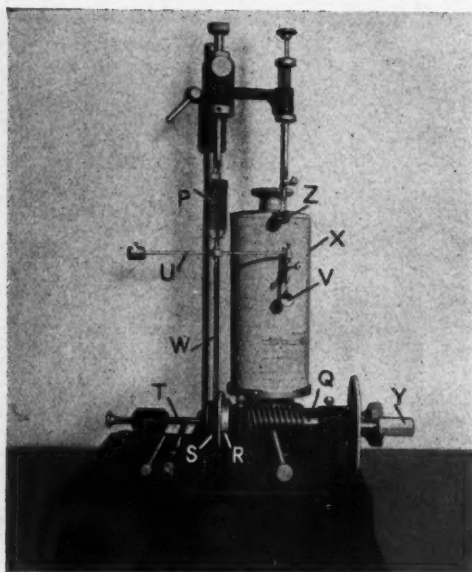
Samples of all coil springs produced are torque-tested against a standard reference spring P, on this small Swiss machine
